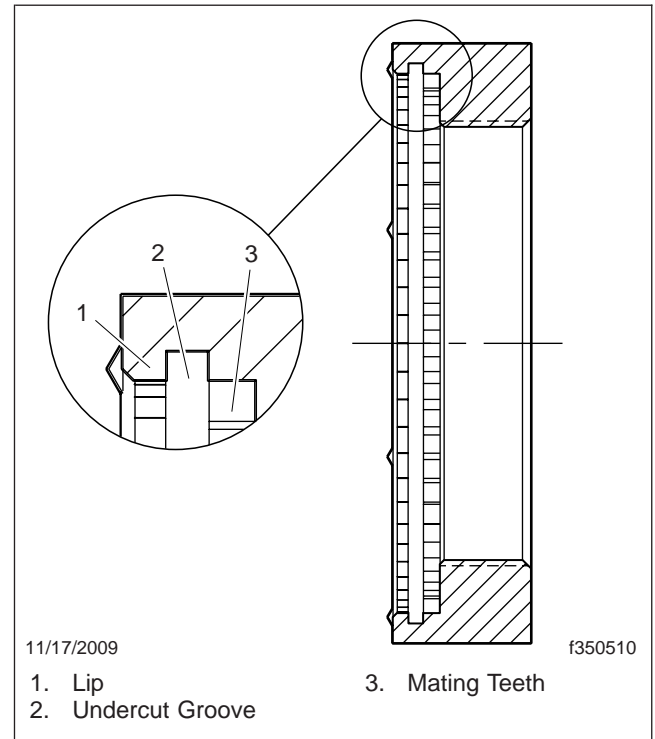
, Pro-Torq Spindle Nut, Cross Section
